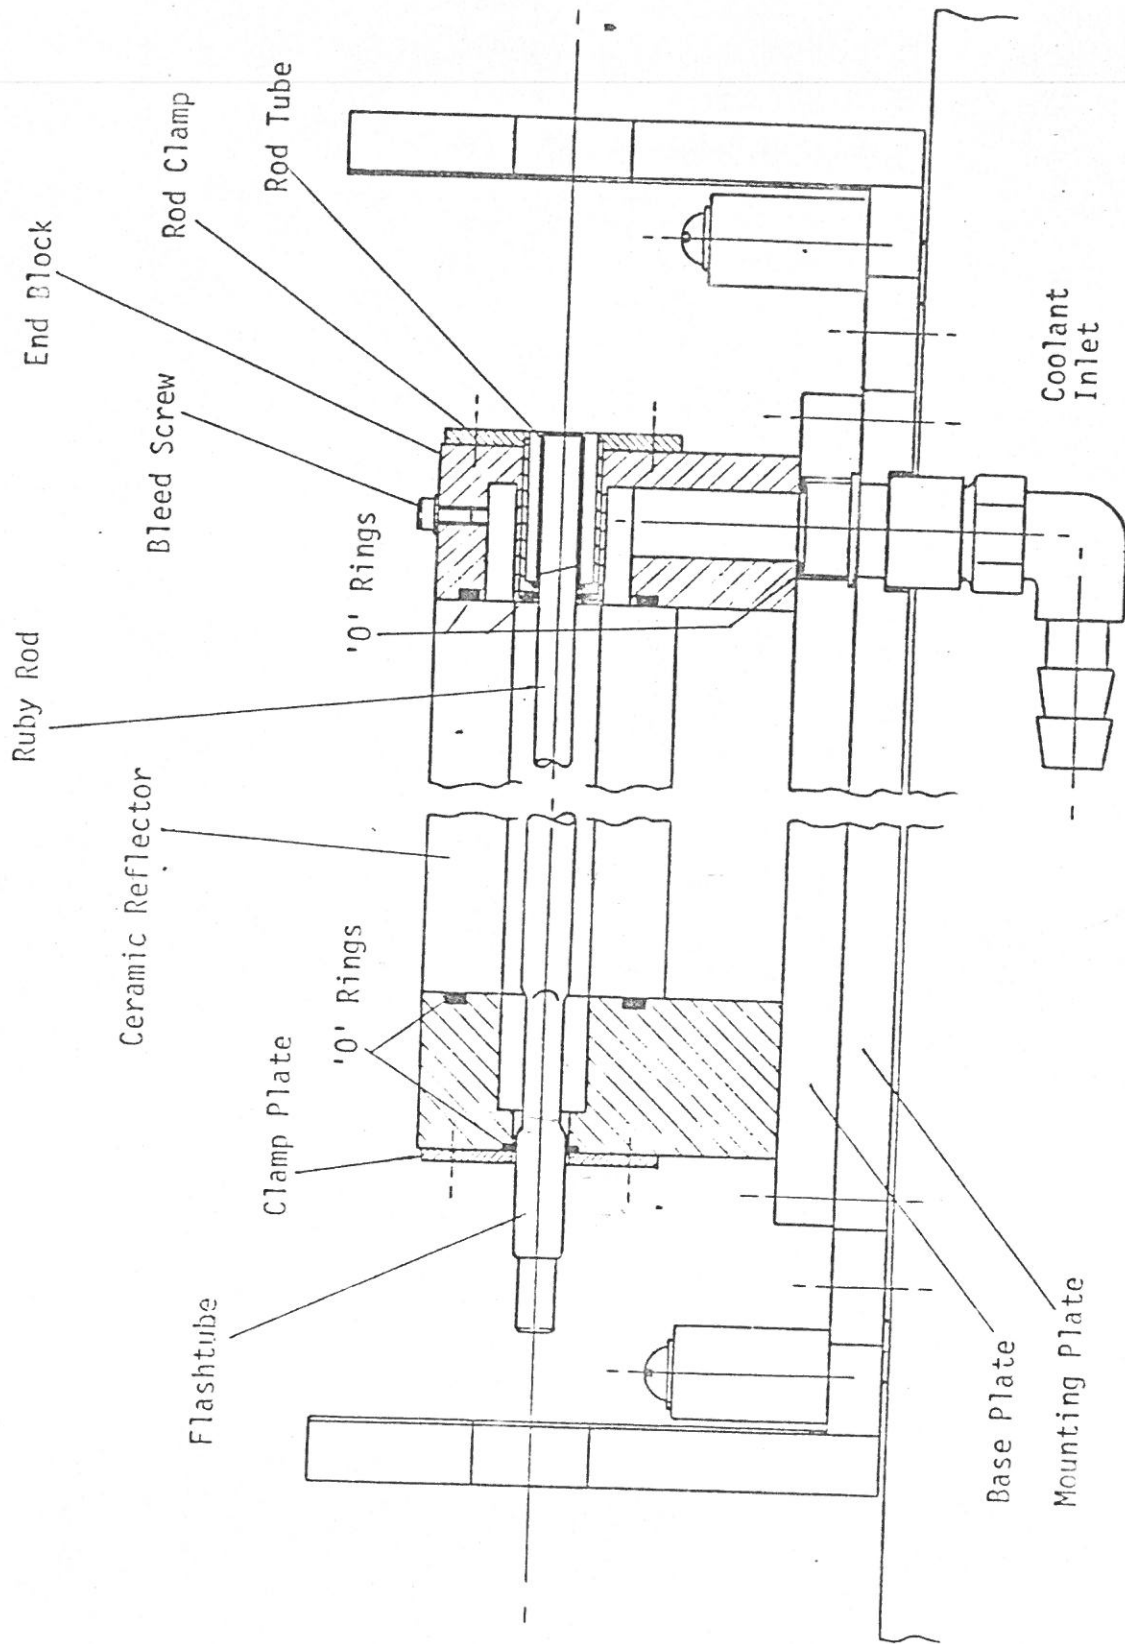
CROSS-SECTIONS OF LASER HEAD ASSEMBLY SHOWING FLASHTUBE (LEFT) AND ROD (RIGHT)
